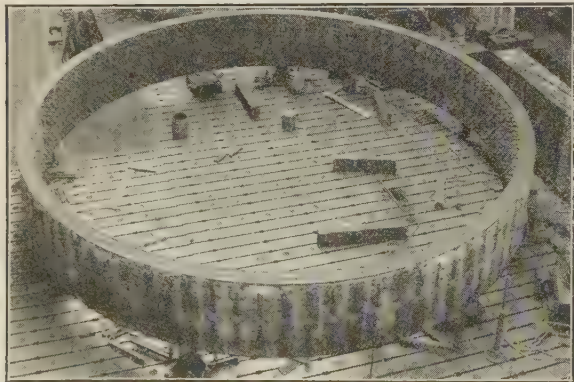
ASSEMBLED ROTOR RIM FOR 40,000-KV-A. CONOWINGO GENERATOR
